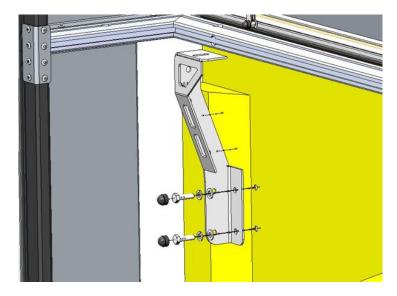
Position Rear Riser Bracket and fasten with M8x30 hex head bolts, washers, nyloc nuts and nut cap over existing holes. Spring Washers on top of the Flat Washer and finish off places the nut caps on the hex bolts
